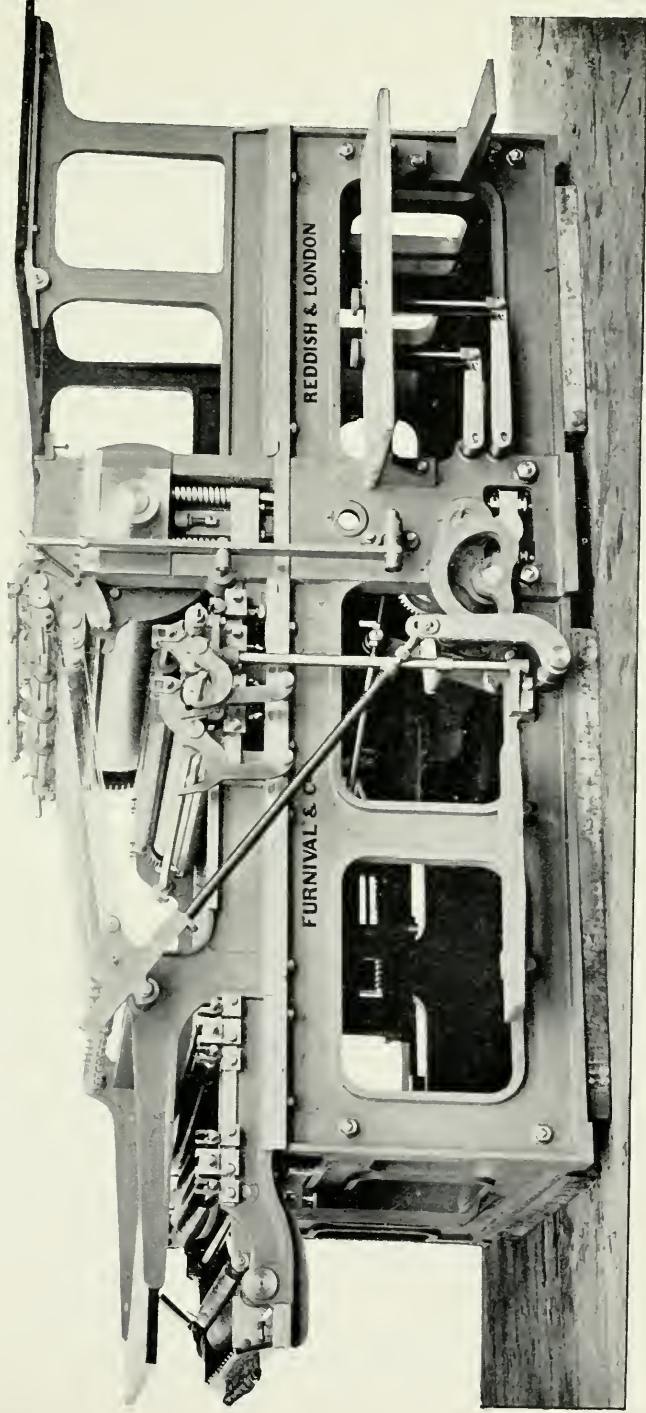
Two-Revolution Single-Cylinder Printing Machine.
